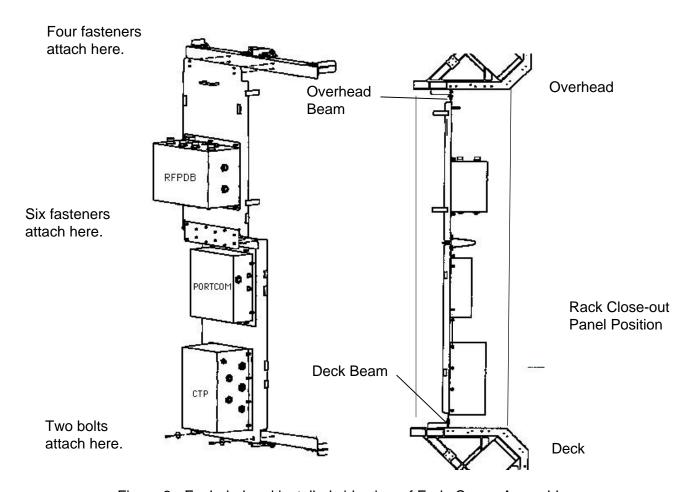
Exploded and installed side view of Early Comm Assembly.
